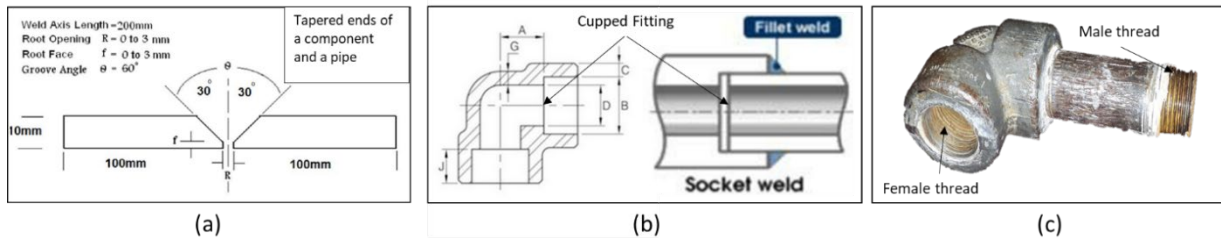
Common connection types across piping components. (a) Butt Weld connection [109].
